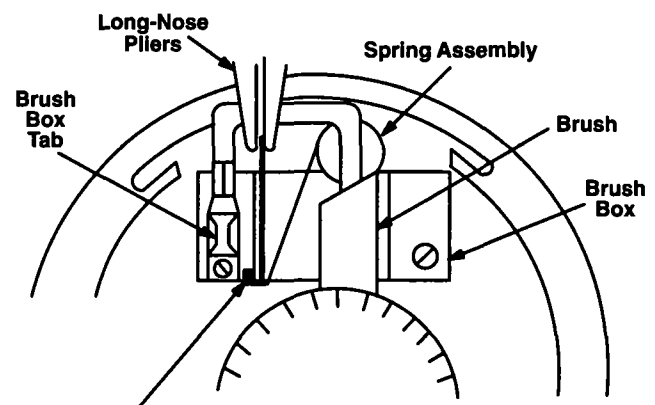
View Of Spring Assembly And Brush When Brush Cap Is Opened
